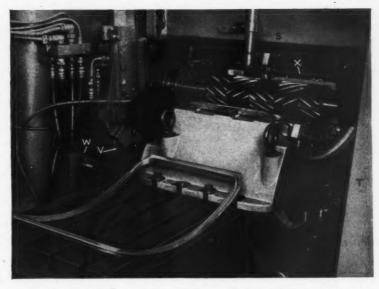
A machined Nimonic frame ready for welding to the main body of the Avon thrust reverser box is here seen on the table of the Cincinnati machine employed for milling the arcuate inner surface
